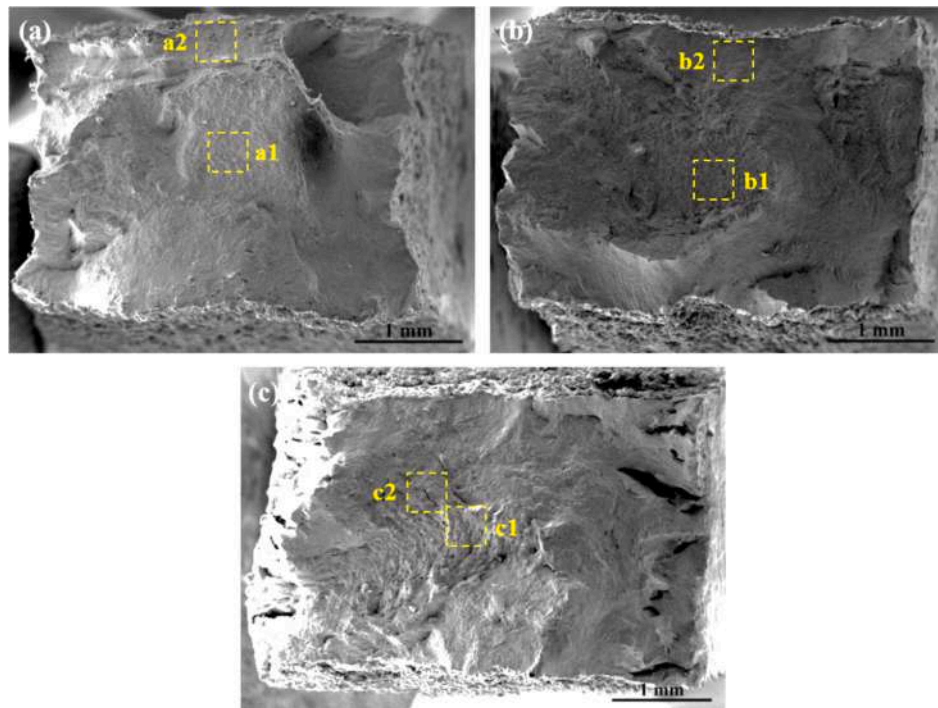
Macro-scale fractography of the fracture surfaces of structures: a) MM, b) FGM-50 %, and c) FGM-25 %.
